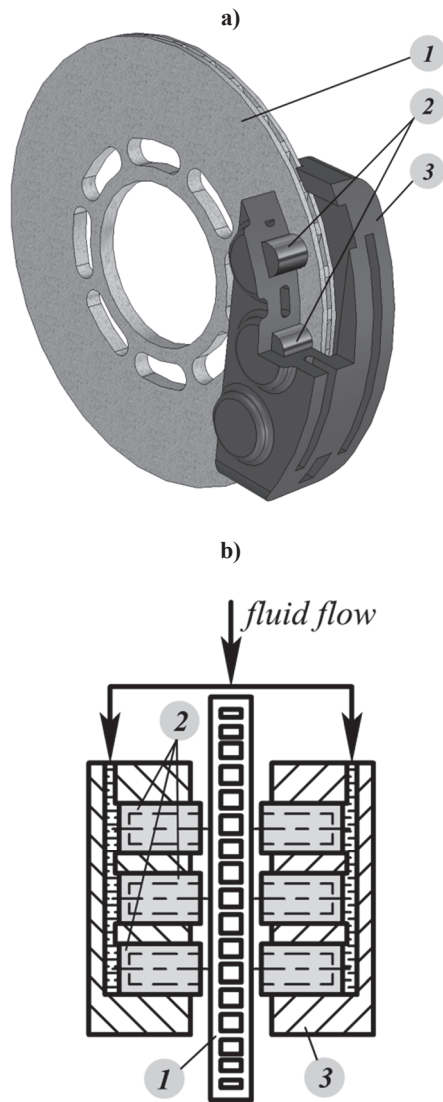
Fixed calliper: 1 – brake disc, 2 – brake pistons, 3 – calliper (hydraulic connections, bleed screws and friction pads are not presented). 3D view (a), cross-section (b).
